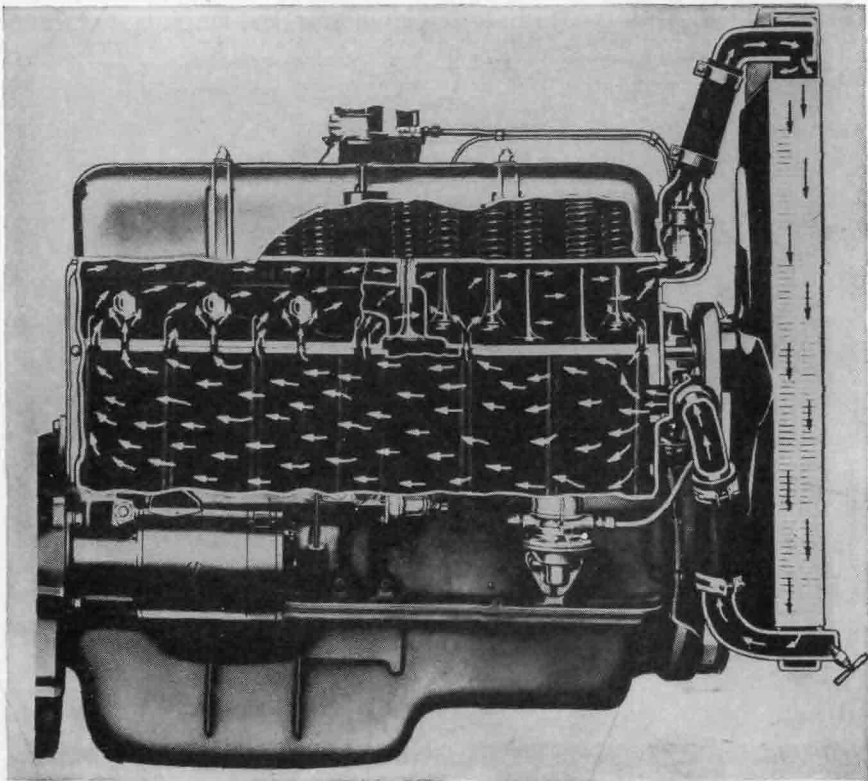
Cooling system used in overhead-valve engine. (*Chevrolet Motor Division of General Motors Corporation*)
